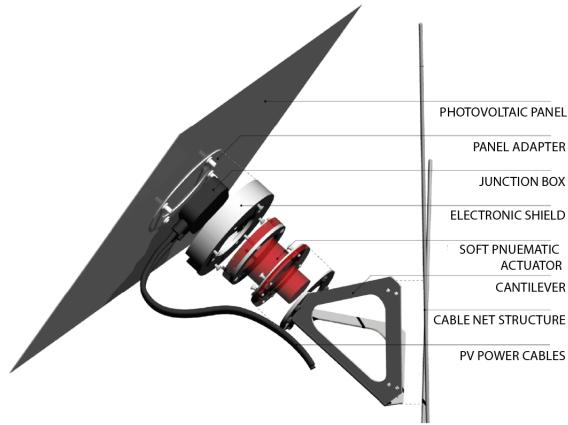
Exploded view of an ASF module mounted on a cable net supporting structure
